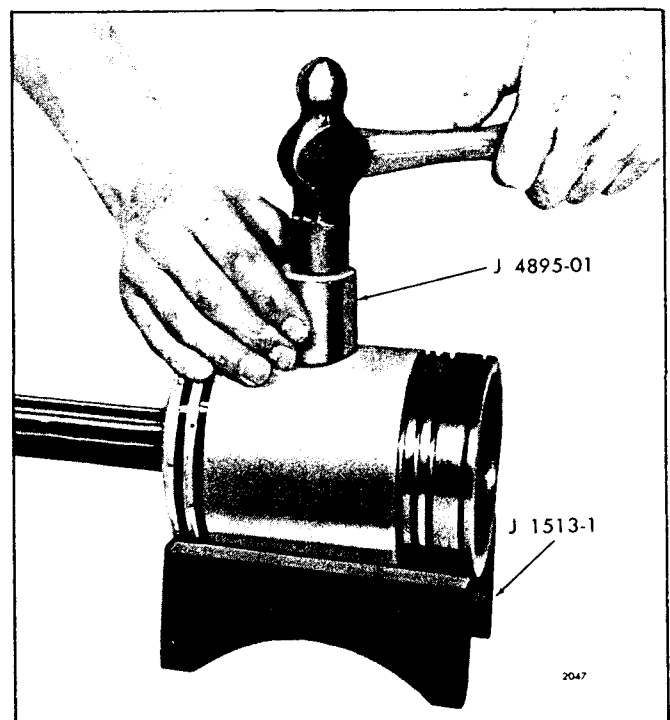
Installing Piston Pin Retainer with Tool J 4895-01
